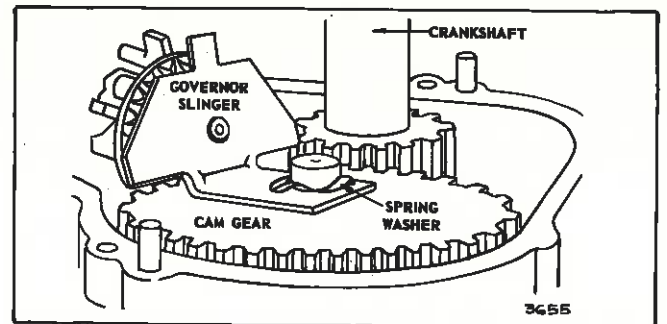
Shows Spring on Camshaft after Governor is Installed. Models 100900 and 130900 Only.
